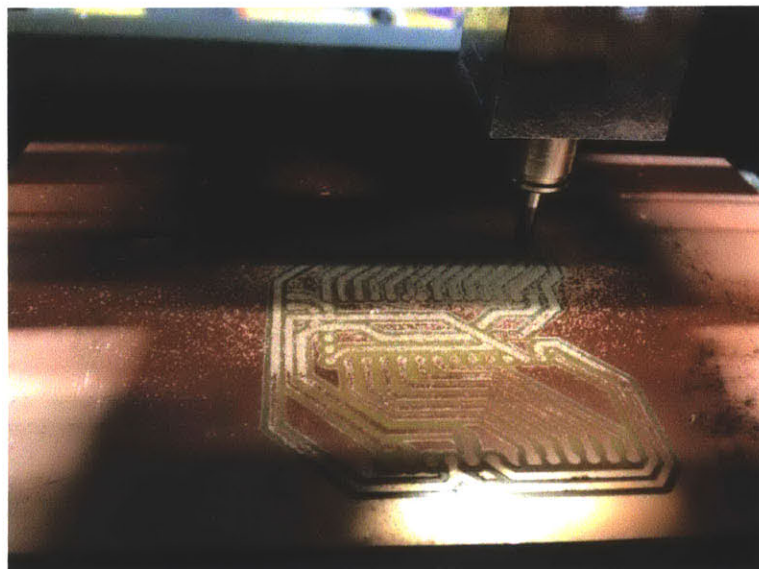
Copper board milled to interface between Teensy, SD card reader and EMG.
